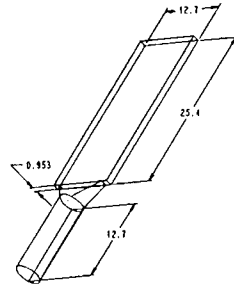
Schematic drawing the experimental casting arrangement. All shown dimensions are given in centimeters. The diameter for the inlet sprue that is inserted into the furnace is 3.175 cm. The depth of the flange connecting the sprue and casting is 3.175 cm.
